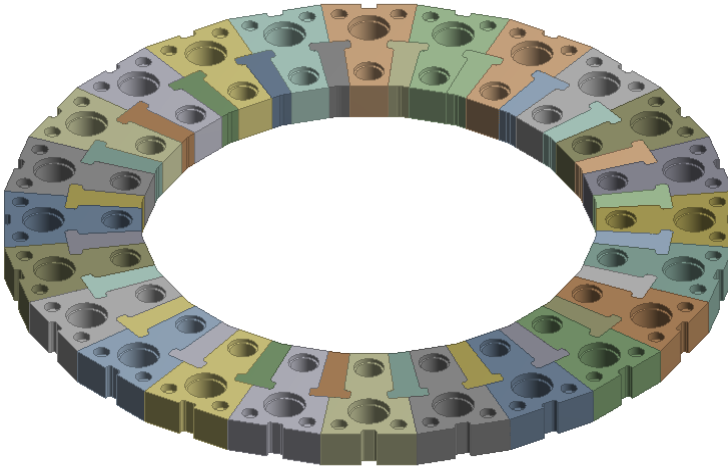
View of a single layer of the SR made up of the control rod blocks and key blocks
